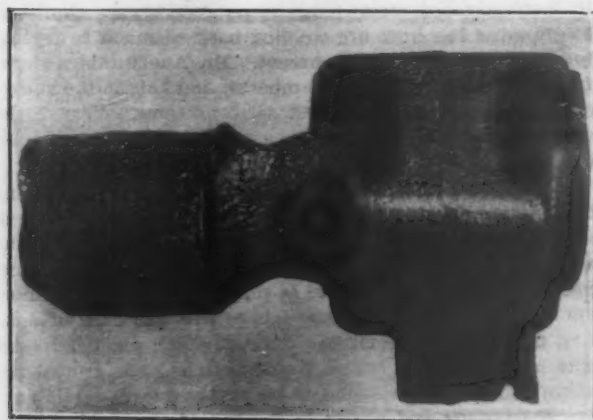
A Steel Casting with a Sink Head that Was Removed with the Electric Arc.
